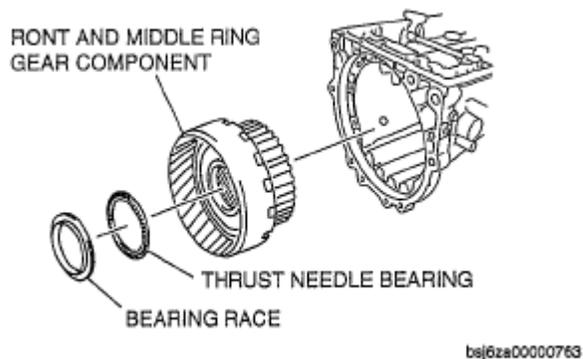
Identifying Front And Middle Ring Gear Component, Thrust Needle Bearing And Bearing Race
